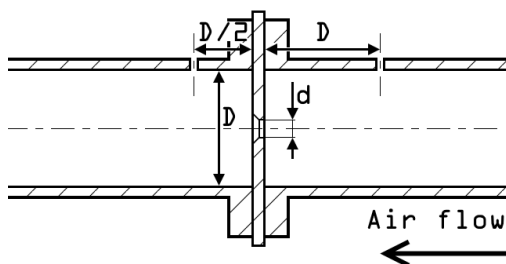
Cross section sketch of the air pipe and orifice plate arrangement
